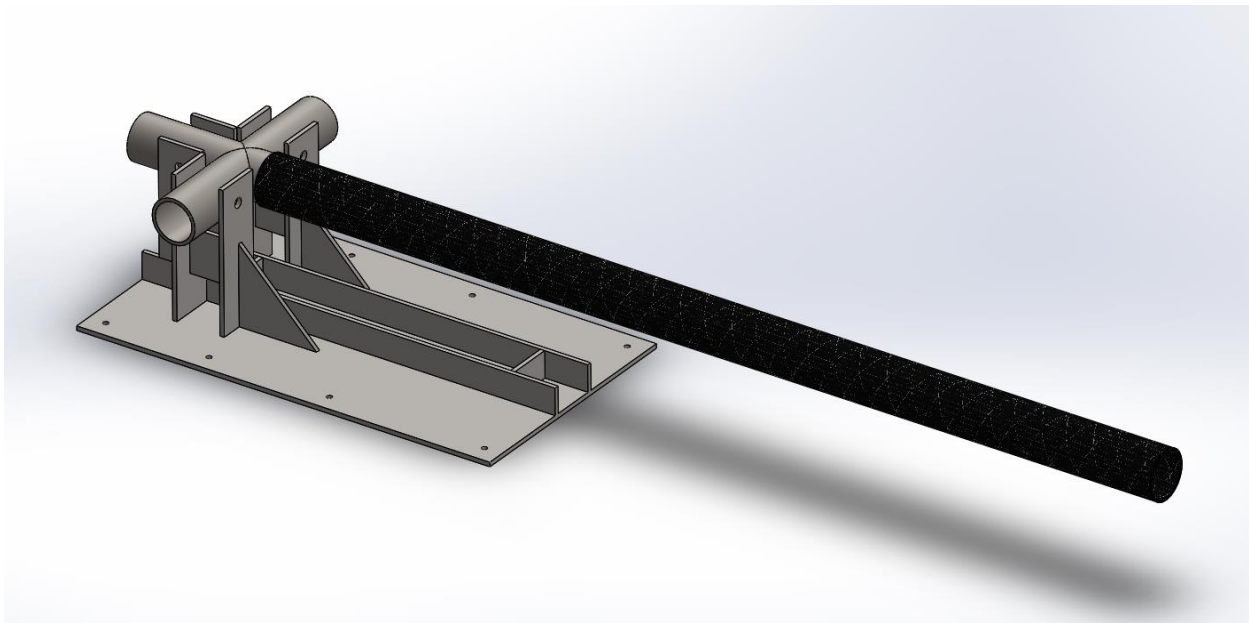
Cantilever beam test assembly illustrating one quadrant of the Electric Commuter Multicopter with a 52" carbon fiber tube, center mount and test fixture.
